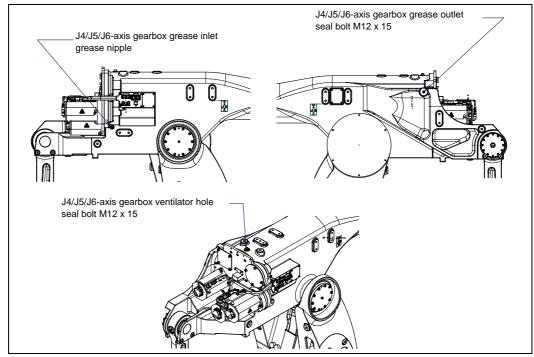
(f) Replacing grease of J4/J5/J6-axis gearbox (M-2000iA/2300/1700L)
